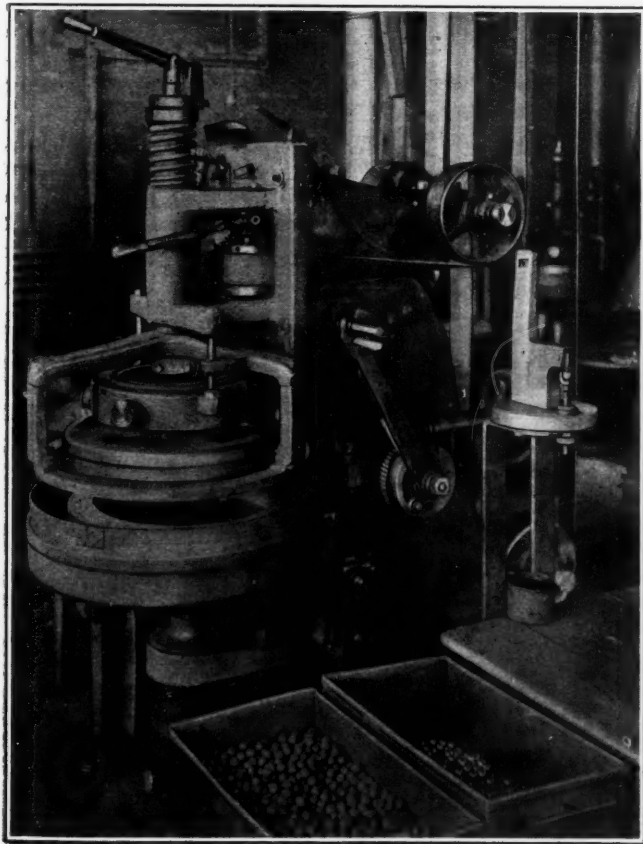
Side View of Dry-grinder, showing Wheel dropped away from Work, a Charge of Balls ready to be dropped into Grinding Position, and Ball being measured for Size in Test Indicator
